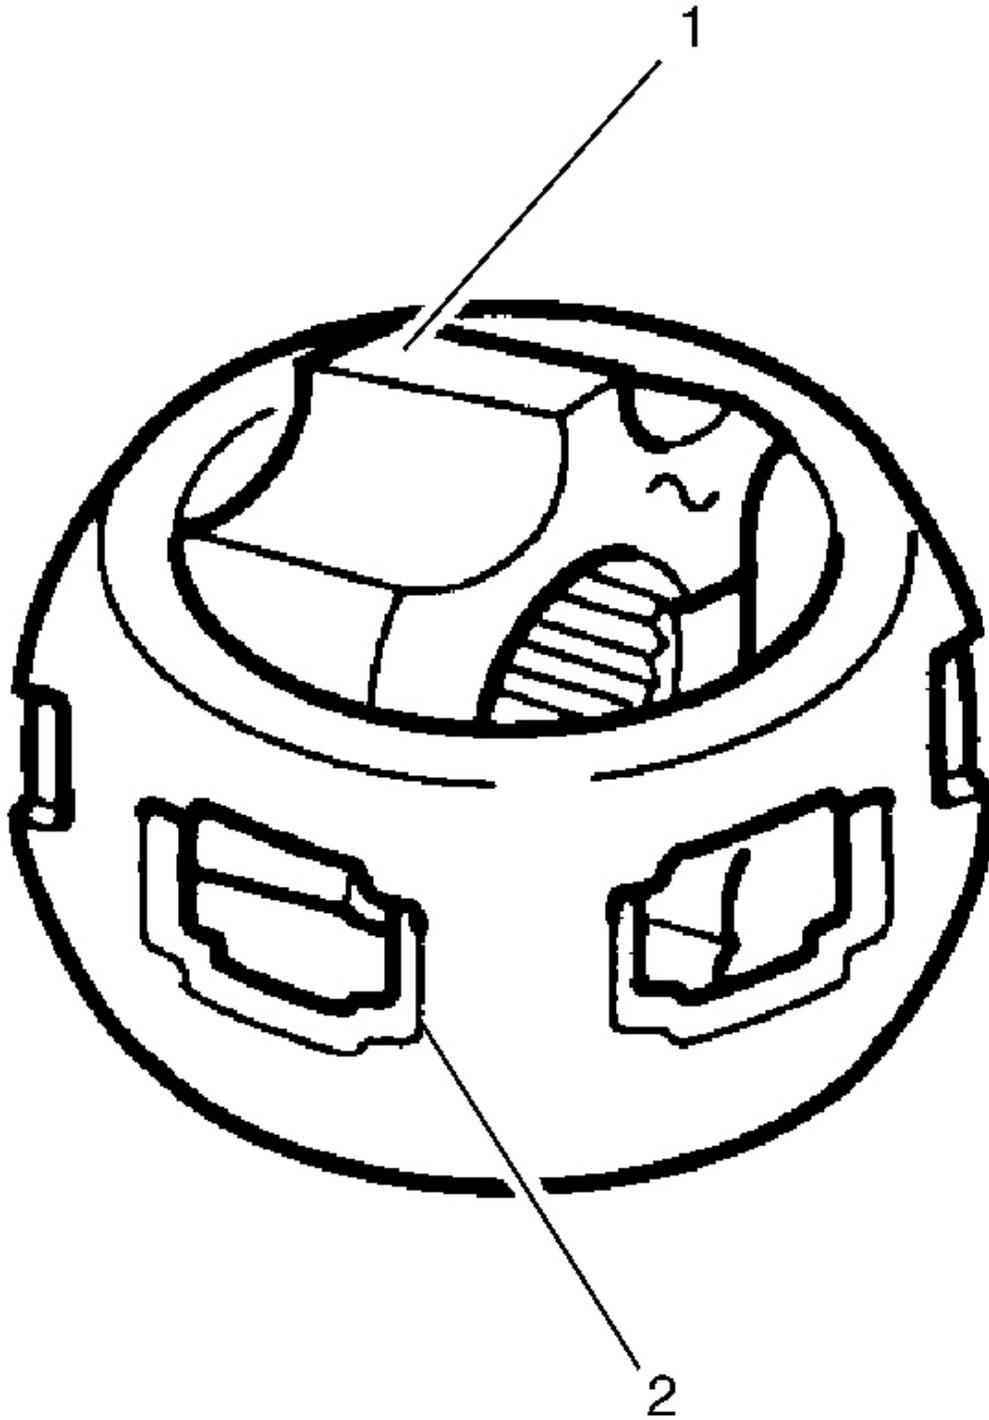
View Of Outer Race, Inner Race, Cage Window & CV Joint Cage
